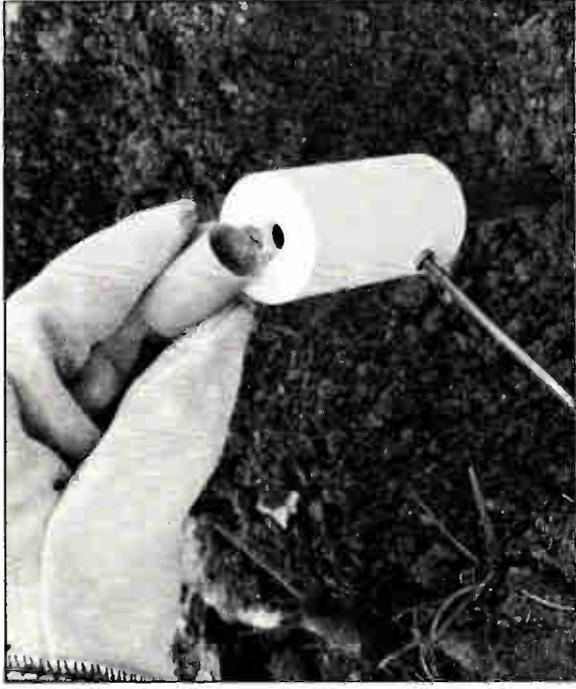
Tap the starting material out of the weld metal container into the hole in the center of the mold cover.
